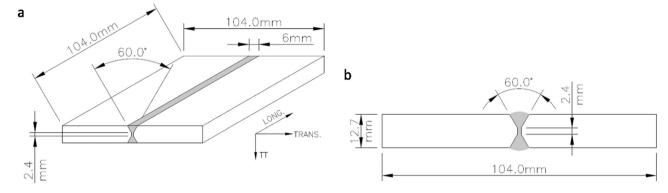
Schematic representation of the double V-butt welded plate.
